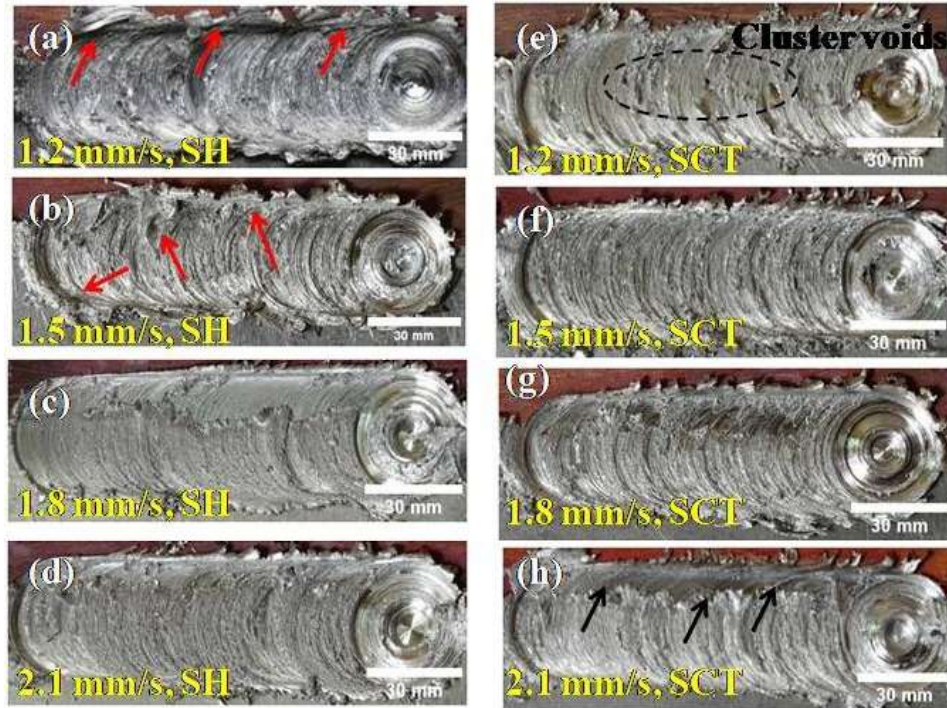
Welded surface at different tool traverse speeds for different tool geometries
